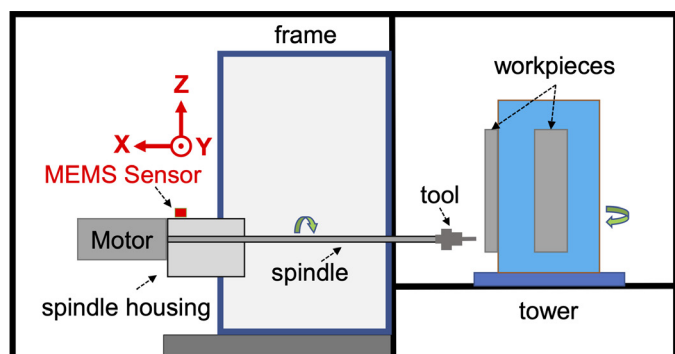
Schematic sketch of the experimental setup: 4-axis machining center with mounted sensor.
